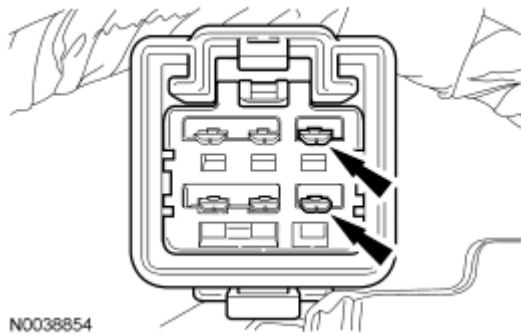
Locating Power Seat Track Motor Electrical Connector Pins
